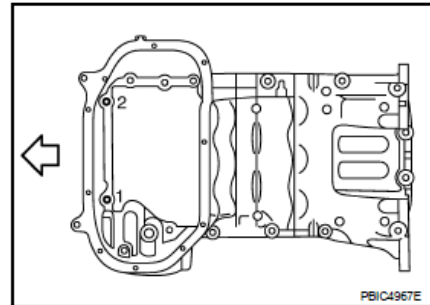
Identifying Oil Pan (Upper) Mounting Bolts Tightening Sequence
